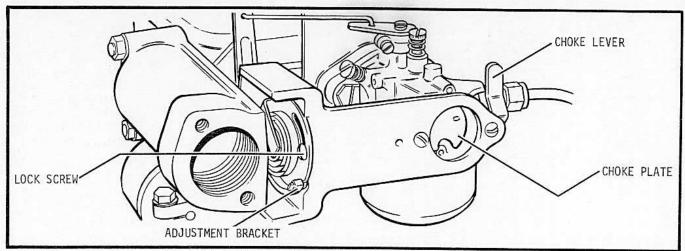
THERMOSTATIC TYPE AUTOMATIC CHOKE
